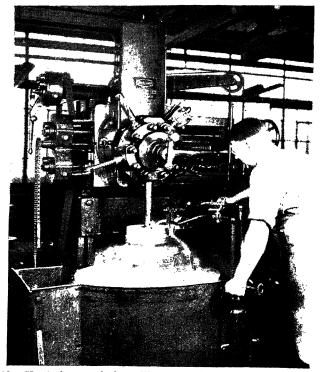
Vertical turret lathe. This tool will drill, rough-bore, finish-bore, and ream. The rotatable cylinder carrying the five tools is known as a turret, hence the name. (The Bullard Co.)
